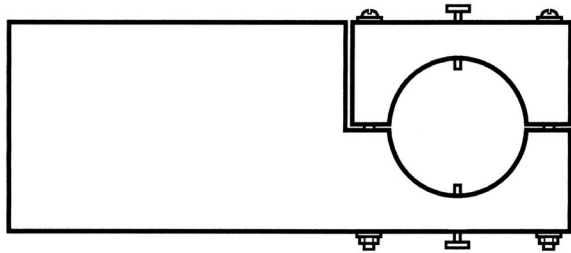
Design of a tool for disassembling the Western Electric E1 handset.
